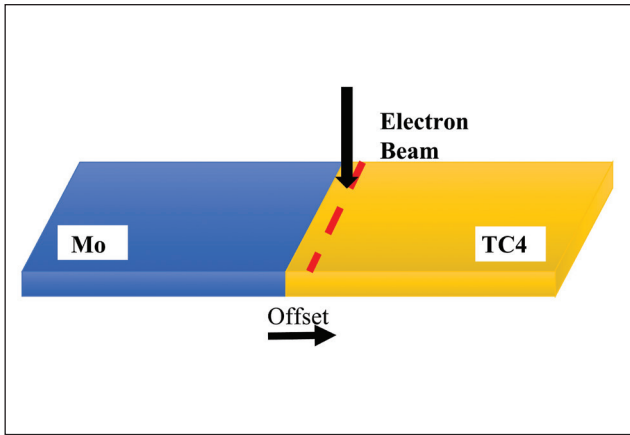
Schematic diagram illustrating electron beam welding Mo/TC4 with offset.
